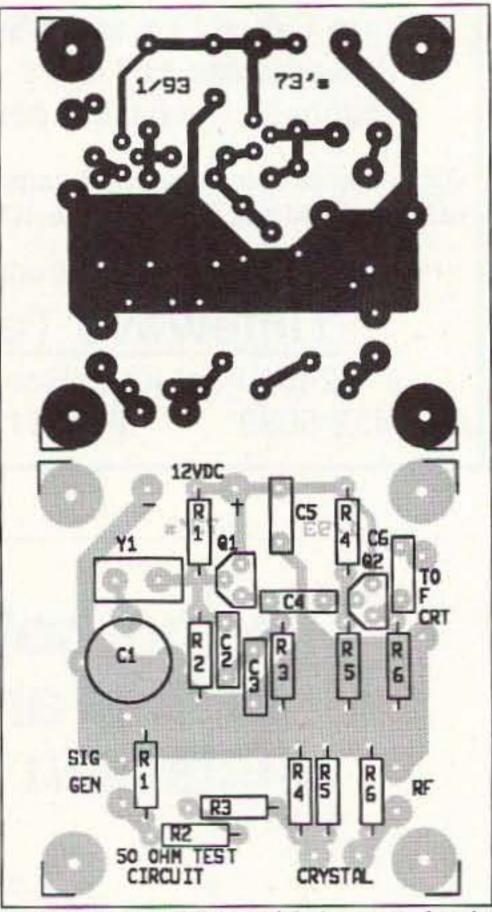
(a). PC board foil pattern for the oscillator circuit. (b). Parts placement. Note that the 50-ohm test circuit shown in Figure 3 is incorporated on this board.
